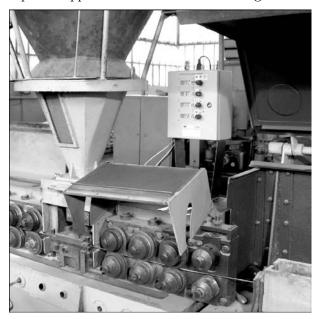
Device for monitoring of filling of the formed sheath of two-layer design flux-cored wire with a charge using a forming unit (SE «Pilot Plant for Welding Consumables of the E.O. Paton Electric Welding Institute»)
